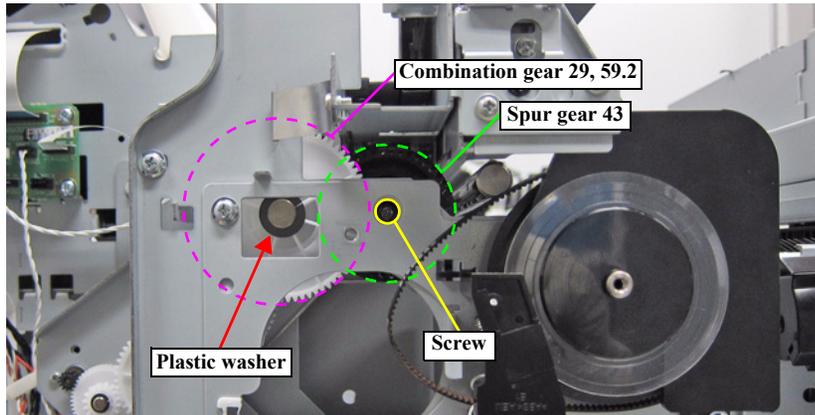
Removing the PRESSURE ROLLER SENSOR (1)
